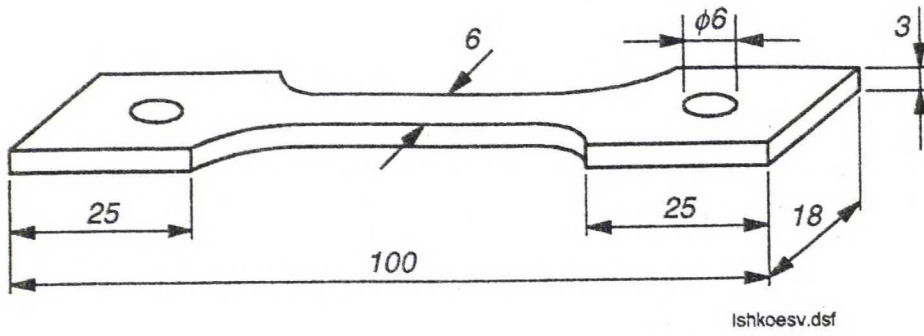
Rectangular cross section (bar) test specimen. Dimensions are in millimeters.
